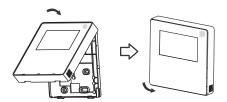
Reattaching the Front Cover of the Wired Controller
